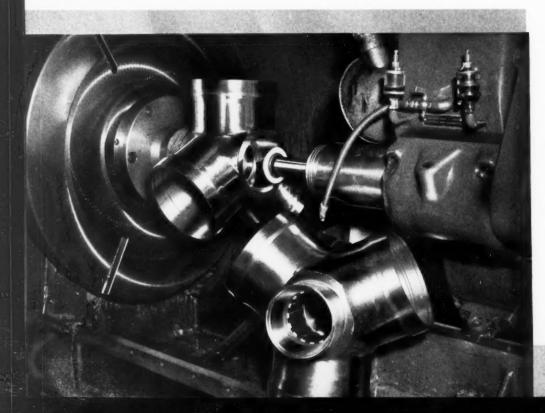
Grinding a Conical Seat in the Crossbore of a Hub Forging on a Chucking Grinder
